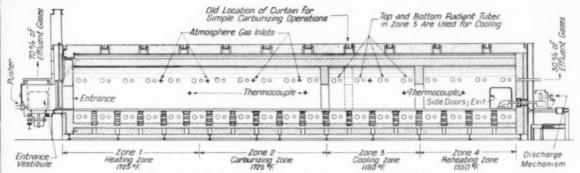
Longitudinal Section of Four-Zone Furnace Adapted From Simple Through-Type Carburizing Furnace. (Courtesy Surface Combustion Corp.)
